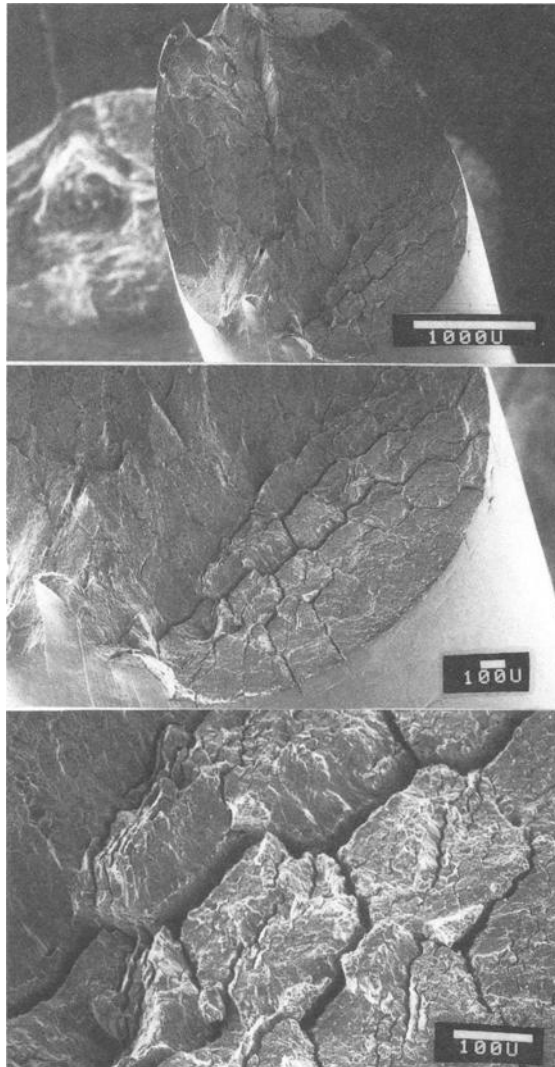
Overall fatigue/fracture surface of an S3 composite showing radial fatigue crack growth region and final shear failure due to the tensile overload.
